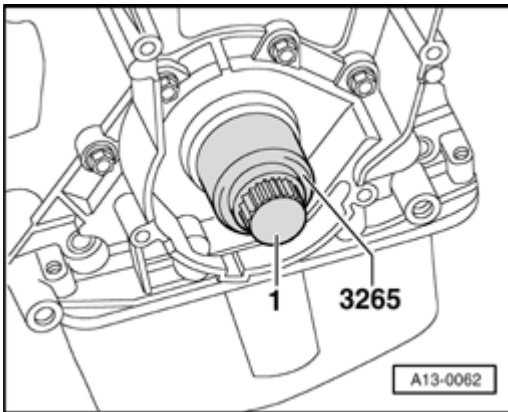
Pressing Seal With Center Bolt Into Sealing Flange Using Seal Installer 3265
